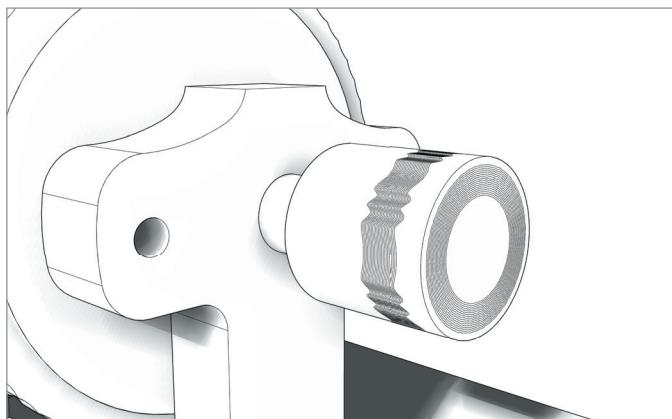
The two surfaces (shaded) that can be cut with a rose engine
